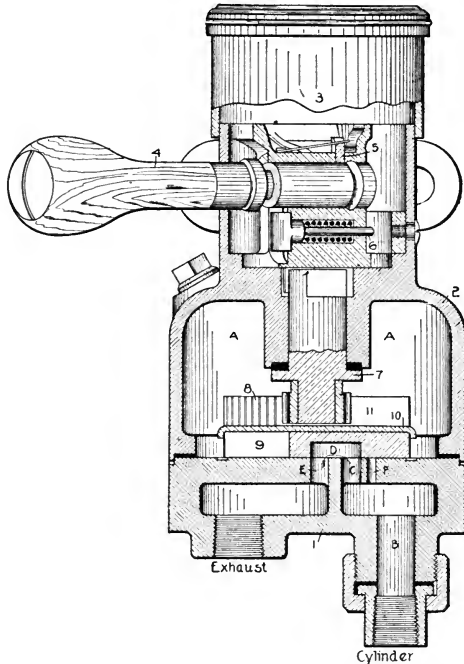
Operating Valve of Westinghouse Straight Air-Brake, View Showing Slide-Valve.
